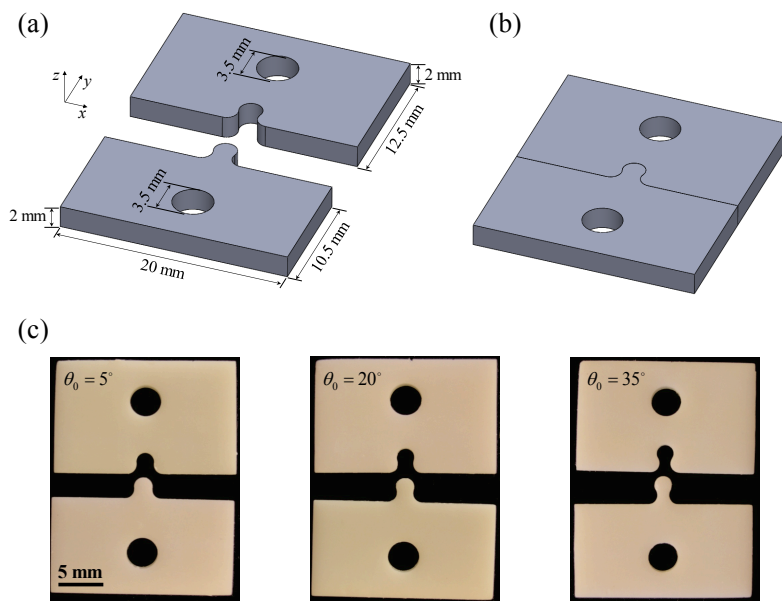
3D printed suture samples: Diagrams showing (a) the shape and dimensions of the two parts of the samples and (b) the assembled sample; (c) Pictures of Samples with different interlocking angles, before assembly.
